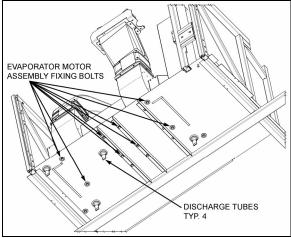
EVAPORATOR MOTOR ASSY FIXING BOLTS 22315
